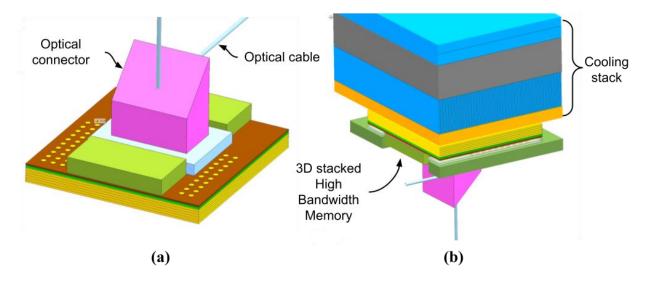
(a) Isometric view of HBM package; (b) deployment with cooling stack
